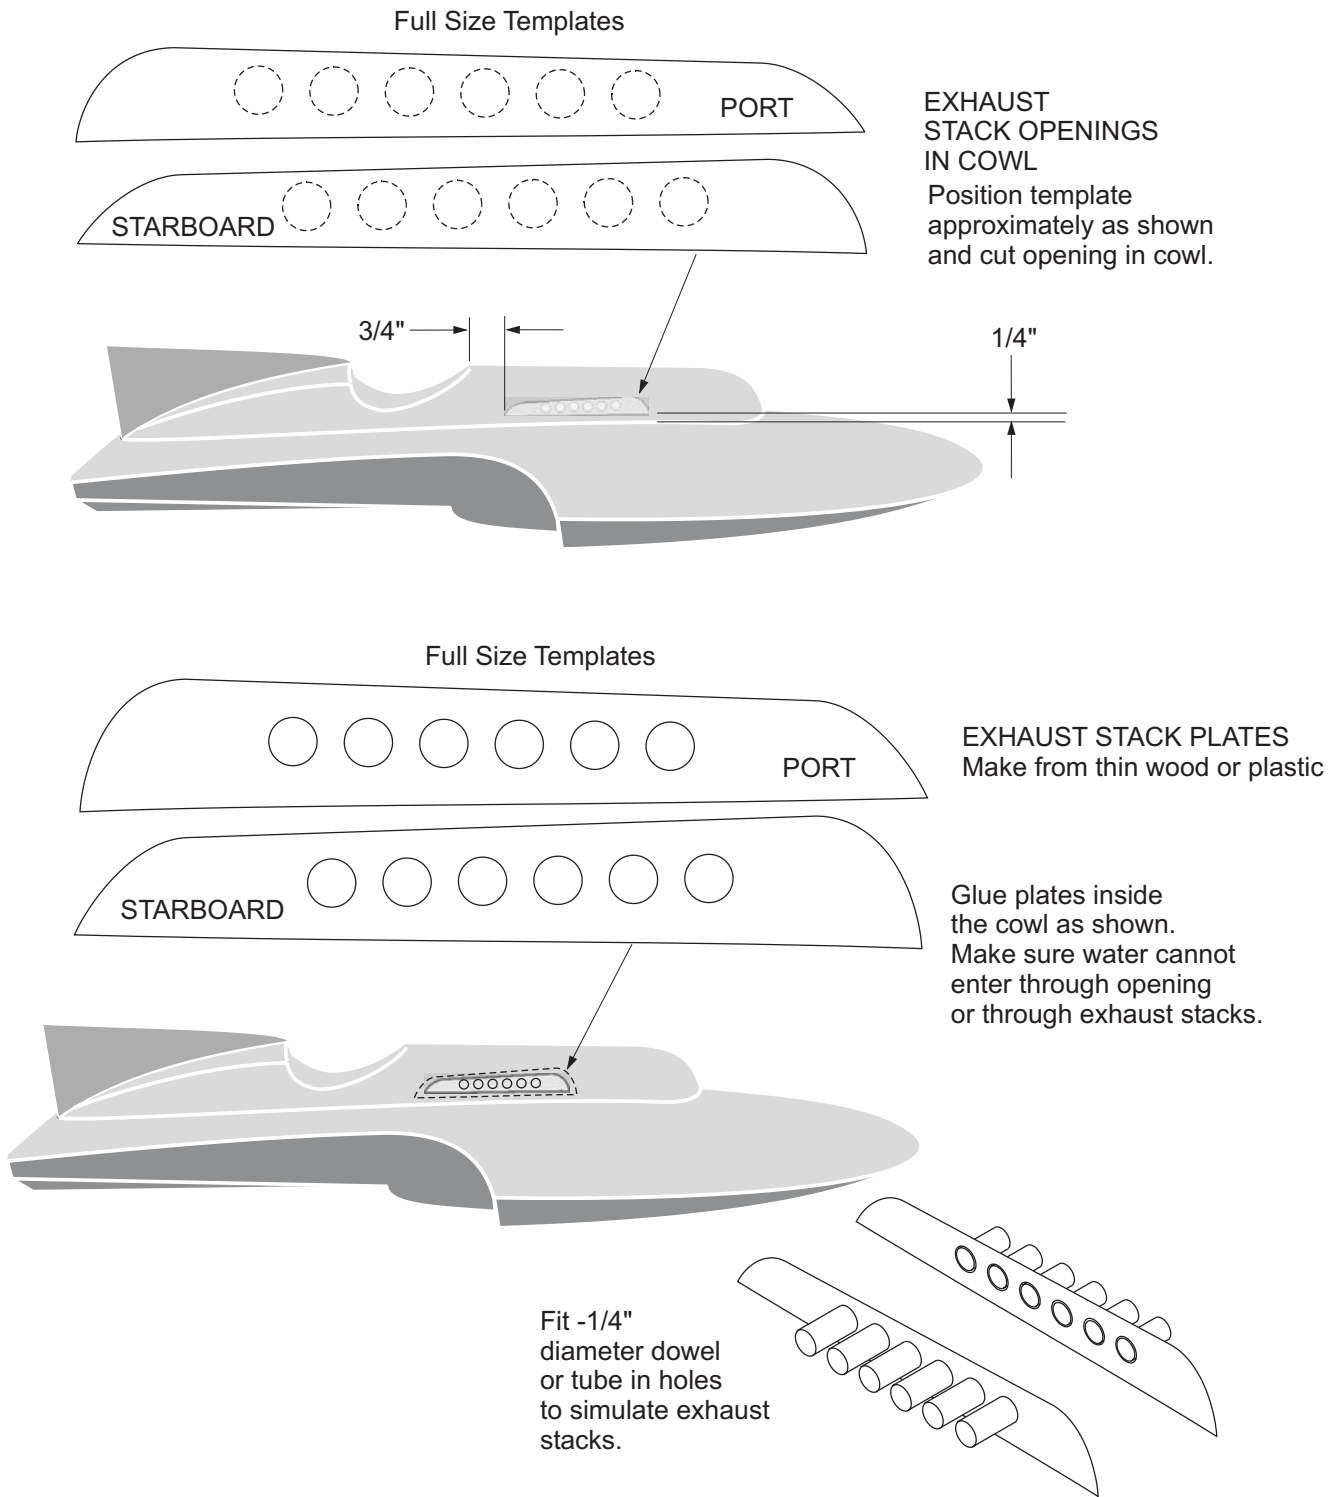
Exhaust Stack Patterns-Laser parts may be included with your kit. Check sizes before cutting the housing.
